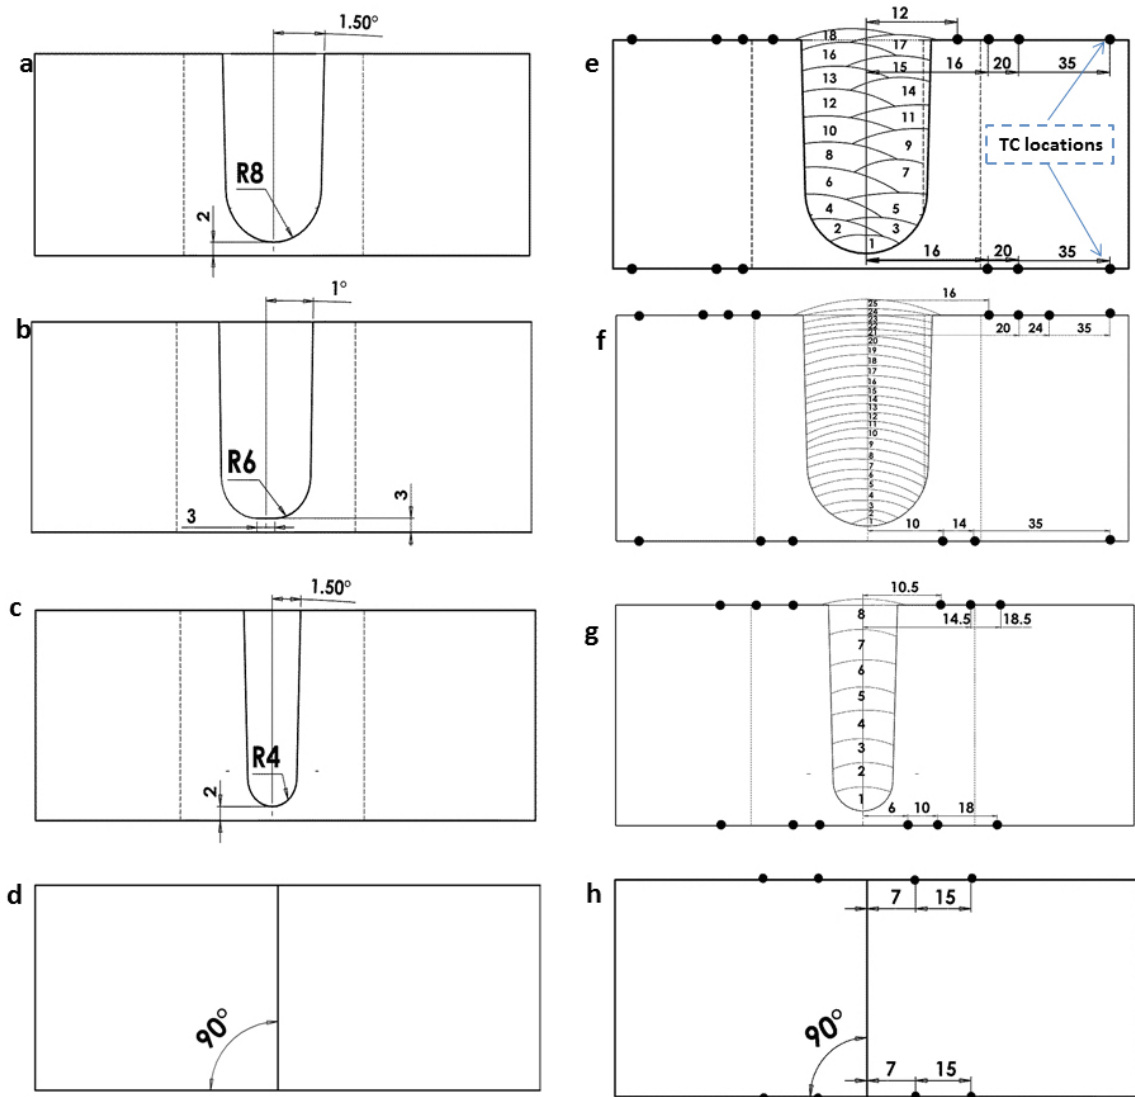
Details of the weld groove geometry and bead stacking pattern for (a) NG-SAW, (b) NG-GTAW, (c) NGLW and (d) RPEB welding. The locations at which thermocouples were attached are also shown for each specimen type.
